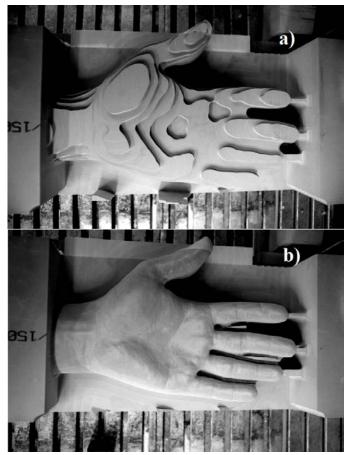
After first clamping: rough milling (a) and finish milling (b)
